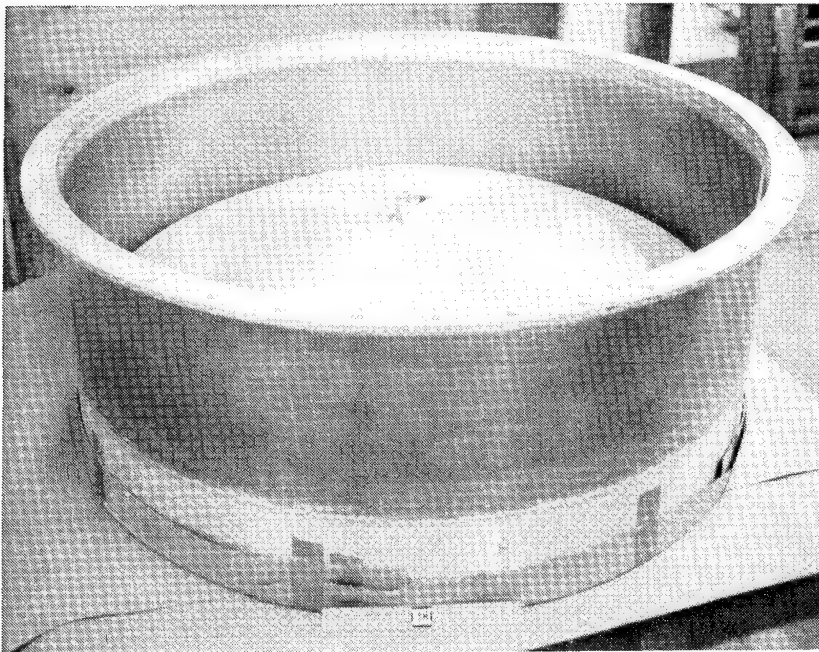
Extension/Support Ring Subassembly, 6061 Aluminum
